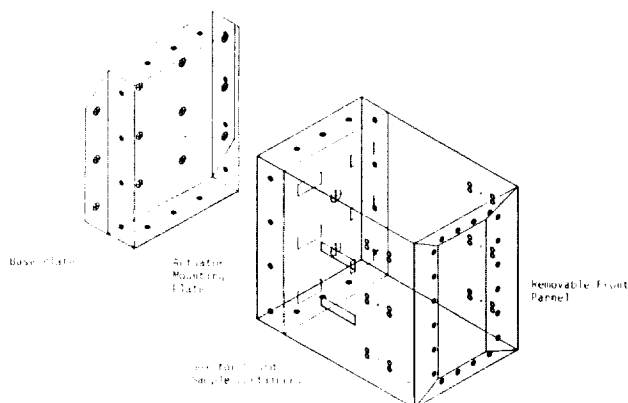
Inner Shell Showing Two Parts and Mounting Plate
